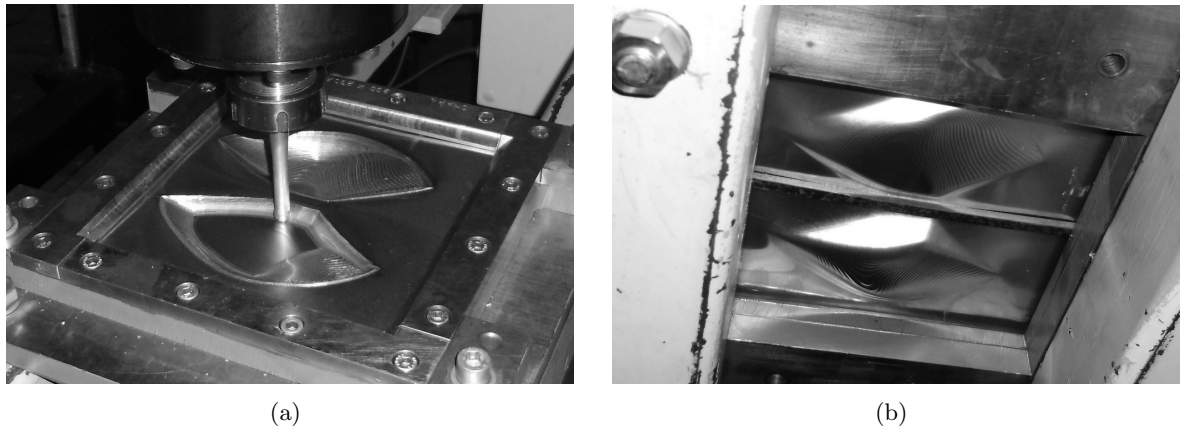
Scaled bike tank prototype side parts manufacture: (a) forming of the second side part, (b) bottom view of the forming operation
